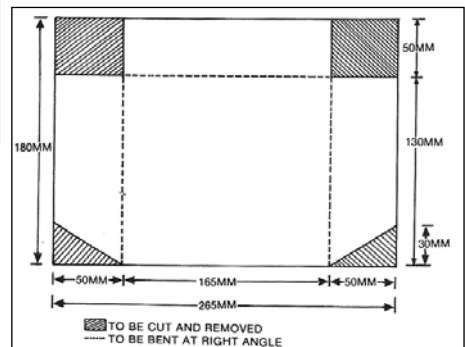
(a): Preparation of chassis from 1mm aluminium sheet.
